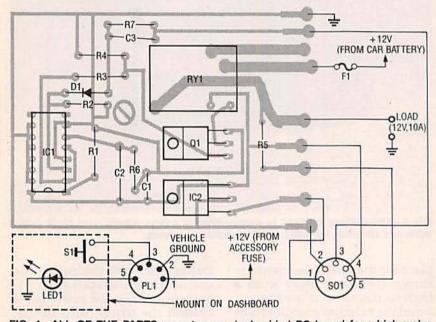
ALL OF THE PARTS mount on a single-sided PC board for which we've provided the foil pattern.
